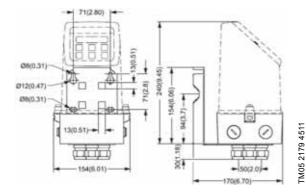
Dimensions - MAG 5000/MAG 6000 wall mounted
